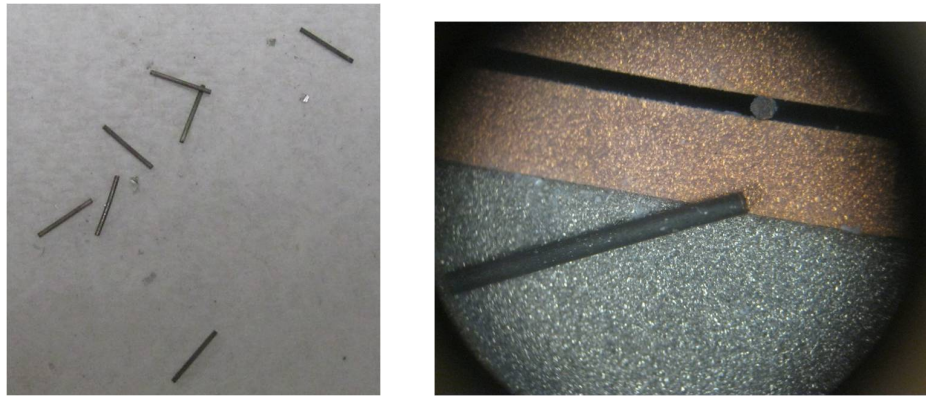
Prototype wire inserts cut with wire EDM by Wire Works Engineering. Left: Several inserts after removal from the cutting jig as seen with the naked eye. Right: Microscope view. One wire can be seen still clamped between the copper surfaces of the prototype cutting jig; the jig and the wire were both cut simultaneously. The cut end of the free wire has clean, hard corners and no apparent fraying.
